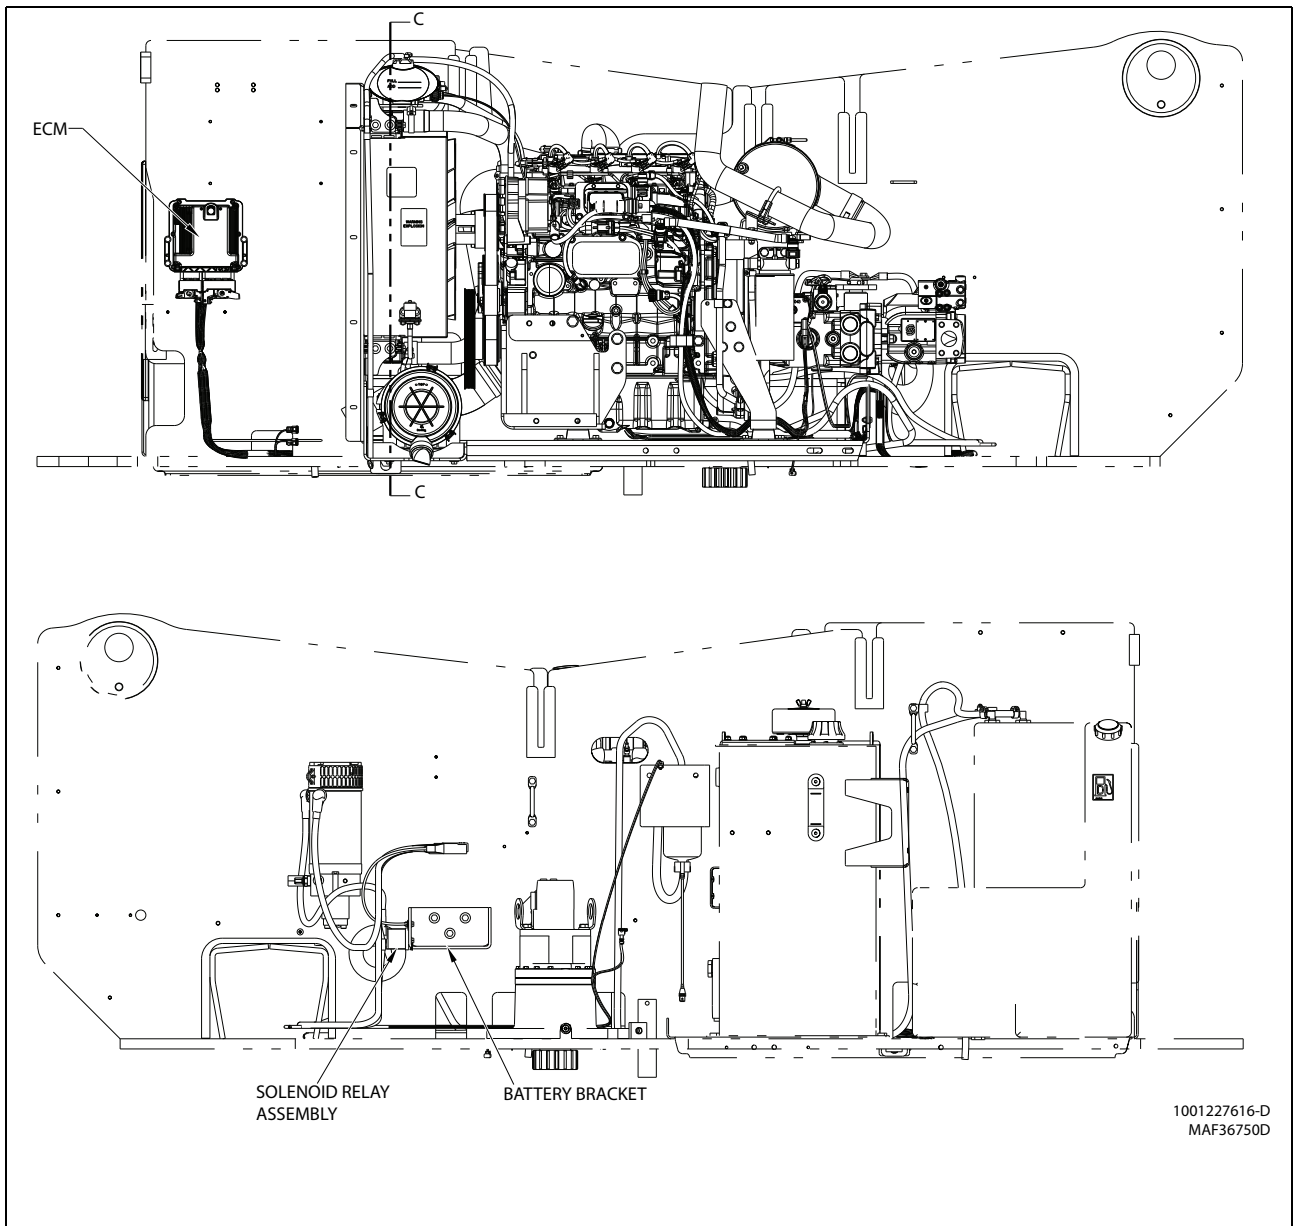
Deutz TD2.9L4 China III Engine Installation - Sheet 2 of 7
